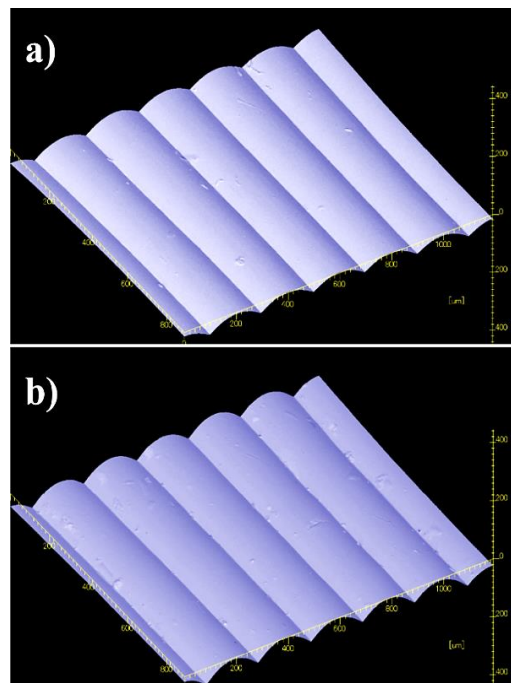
View of the examples of PLA FDM printed walls: a) infill 25%, b) infill 100% with no surface abrasive defects. 3D reconstruction shows that layer high at 0.2 mm are repetitive
